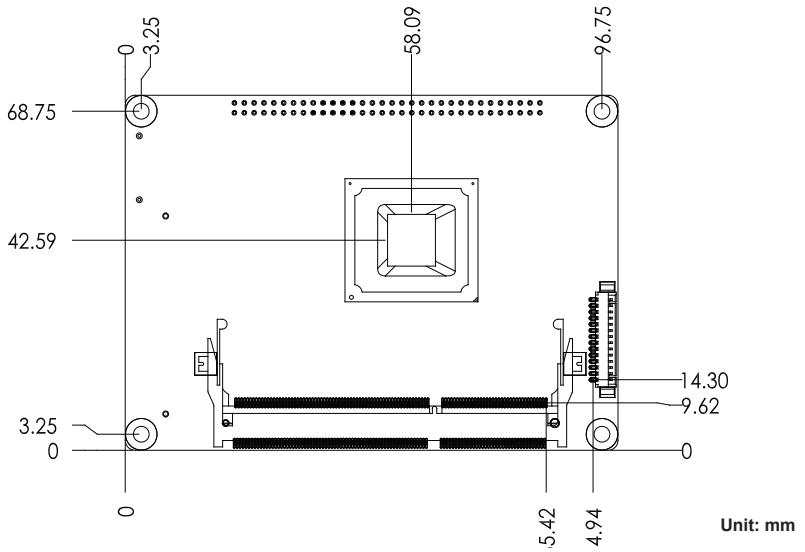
MIO-3260 Mechanical Drawing (Top View)
